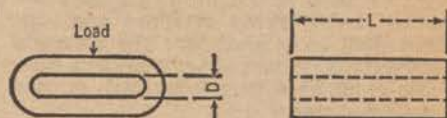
Deformed Specimen of Vacuum Brake Hose.
